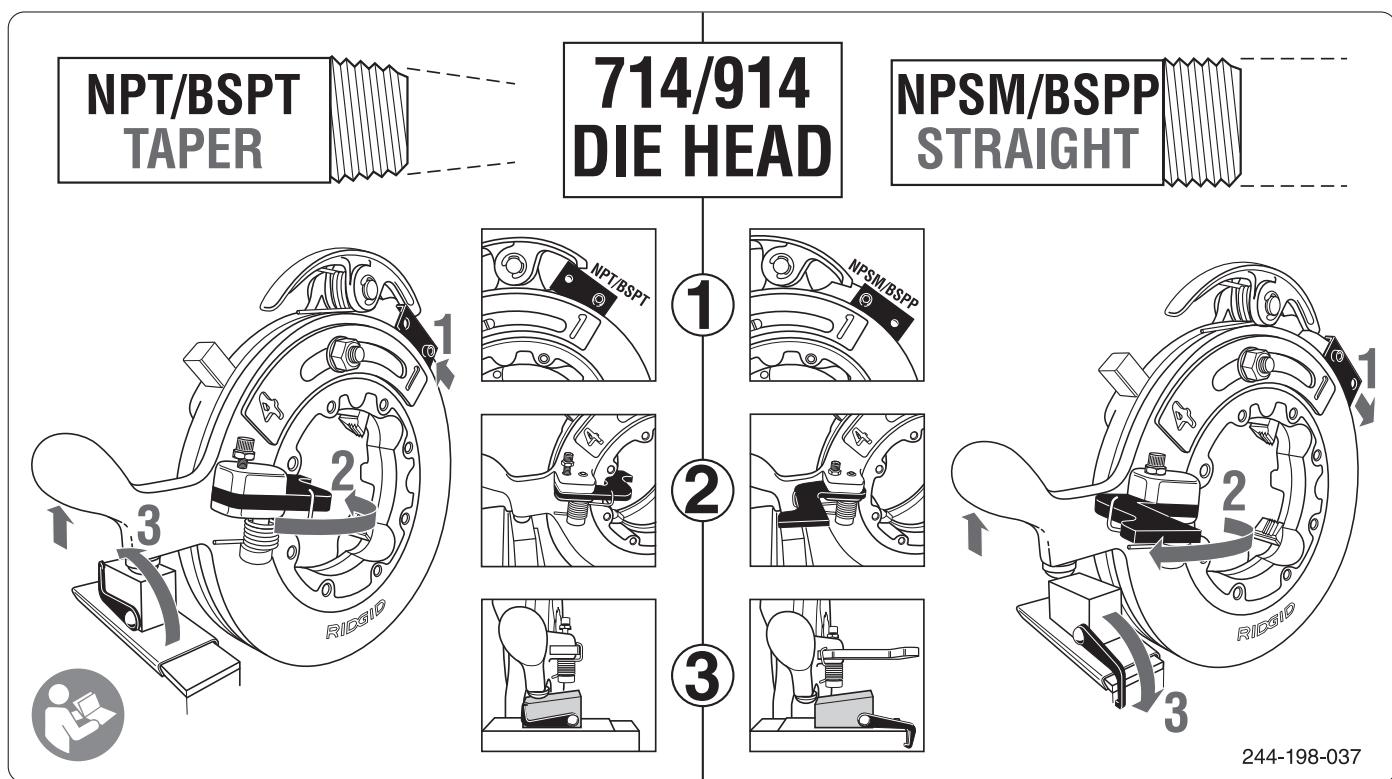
Adjusting for Tapered or Straight Pipe Threads
